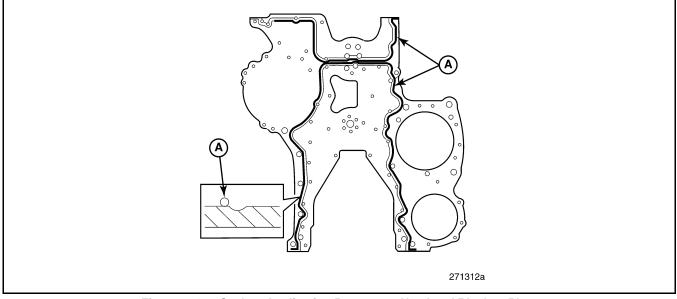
Sealant Application Patterns — Head and Block to Plate
